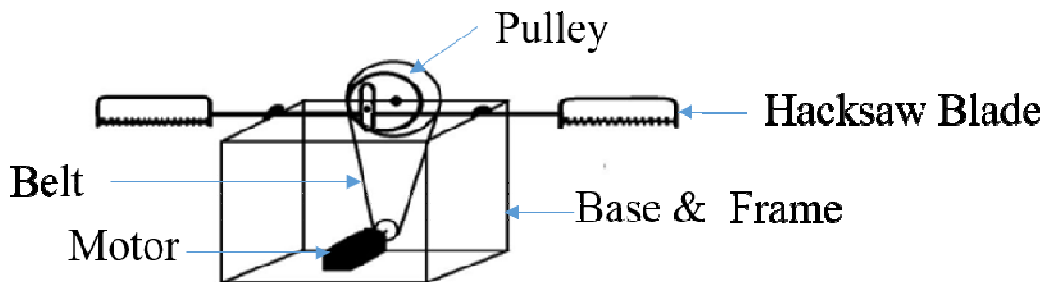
Demonstrate the Rough Sketch of the Double Hacksaw Machine with Automatic Cooling Power.
